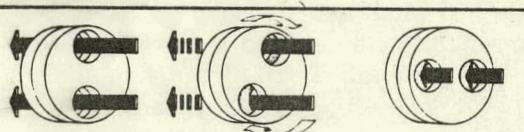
Willis Oil-and-Tool Rotating-Disc-Type Valve
